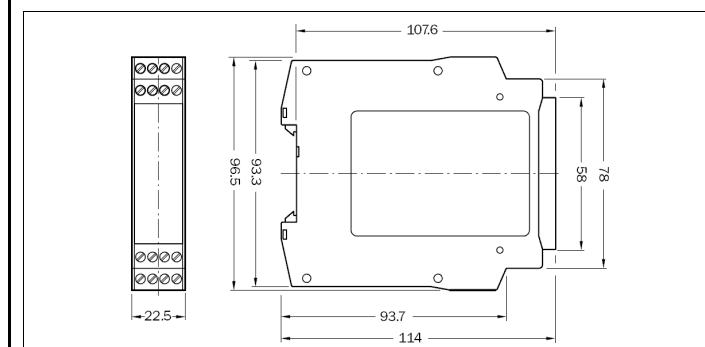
Dimensional drawing UE11-4DX with removable terminals (mm)
